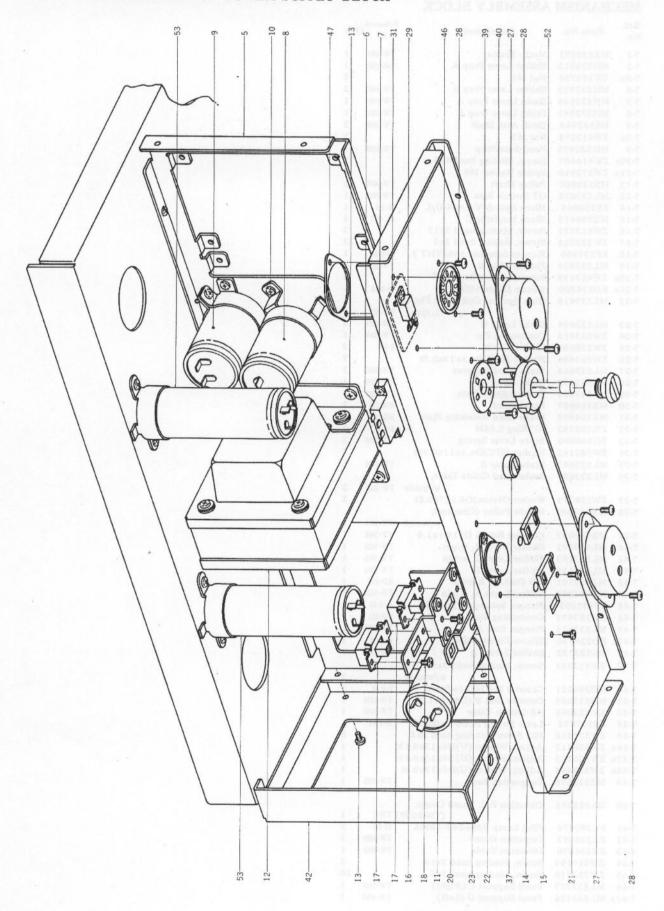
ILLUSTRATION OF MECHANISM ASSEMBLY BLOCK
